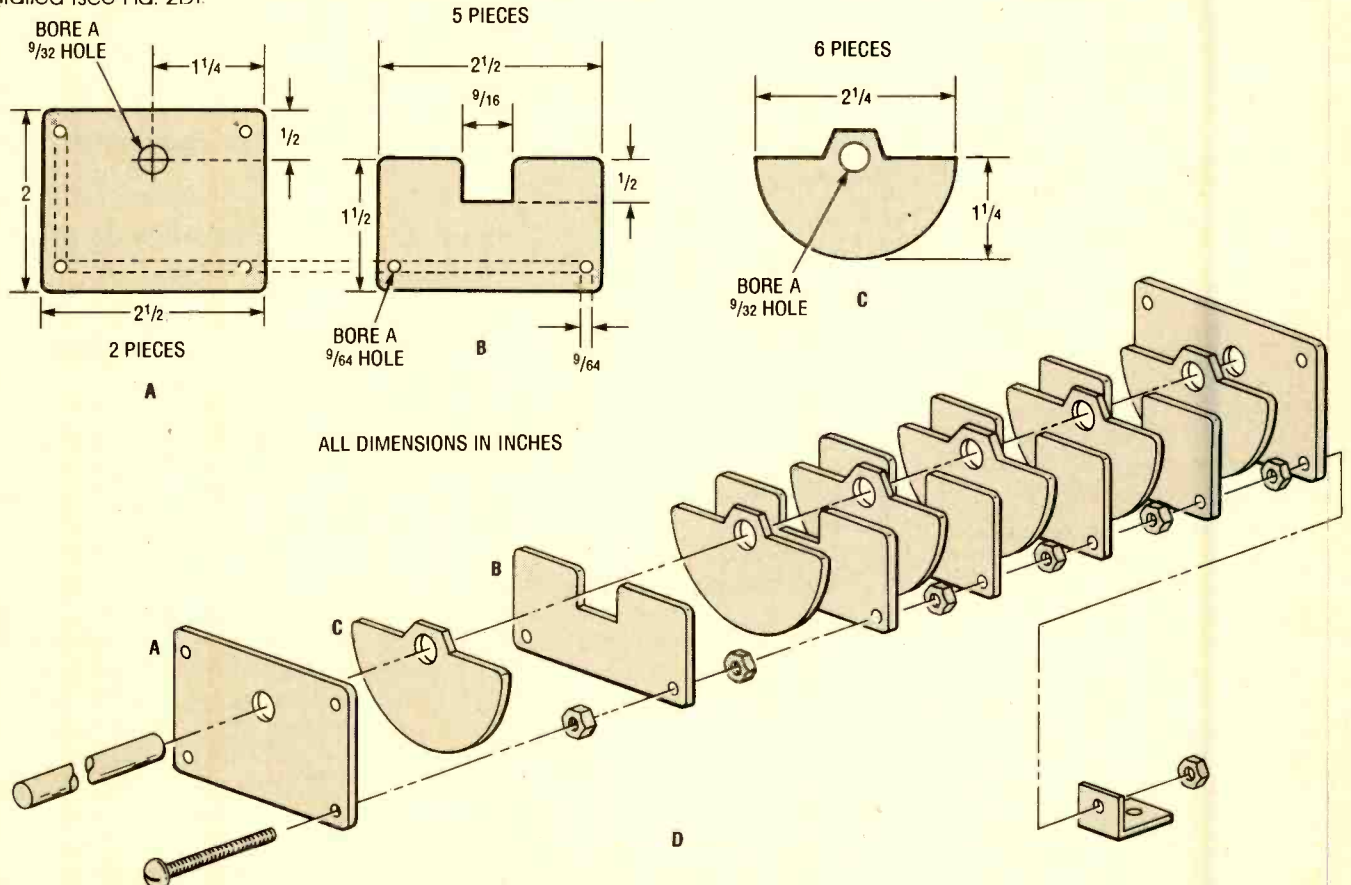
The variable capacitor, C1, in the home-brewed radio was fabricated from variously shaped pieces of unetched double-sided, printed-circuit material. Fabrication details of that unit are shown here.
